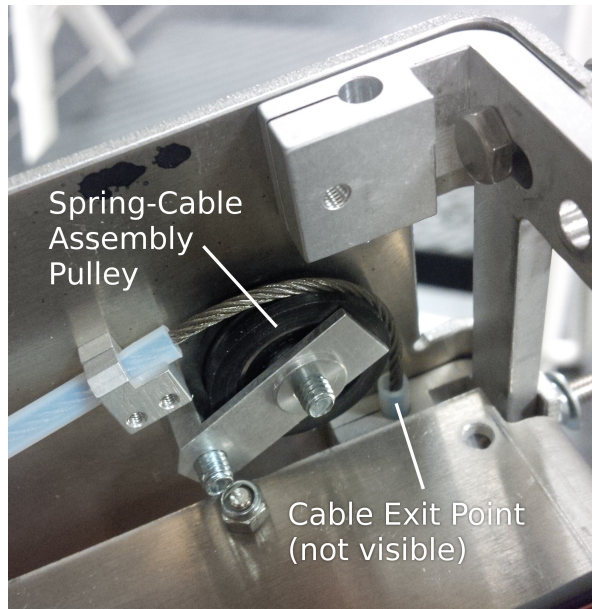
Internal view of the pulley and exit point of the steel cable, which connects to springs inside the strut tube on one end and to the external vectran cables on the other.
